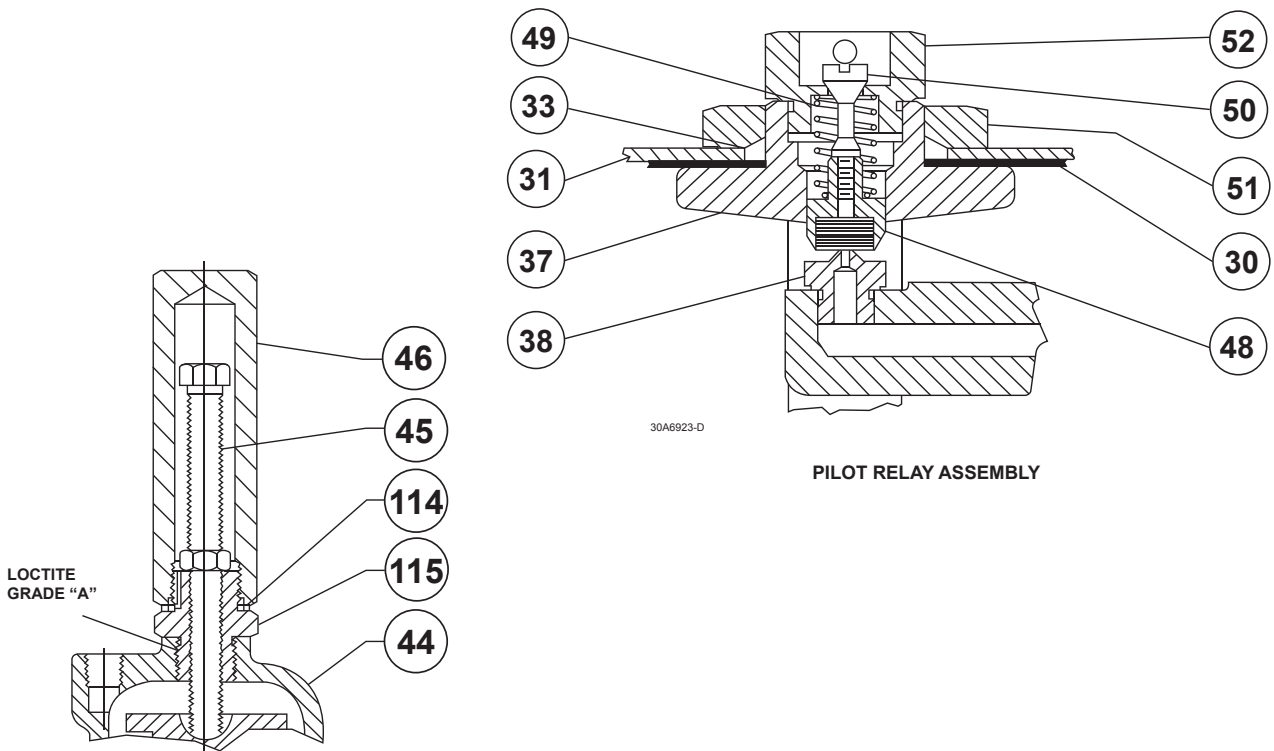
O-Ring Sealed Handwheel Adjustment Accessory Assembly
